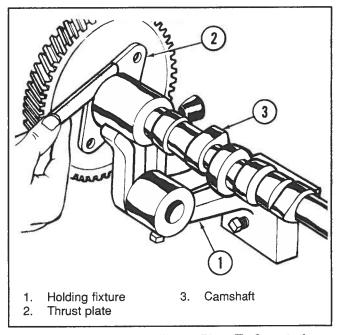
Checking Thrust-Plate-To-Camshaft Front Journal End-Play
